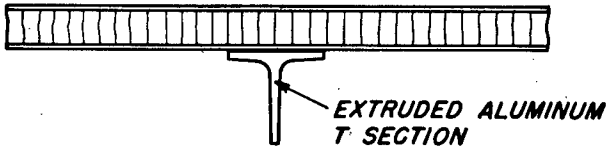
T-section bonded to one facing of an aluminum-faced sandwich.
